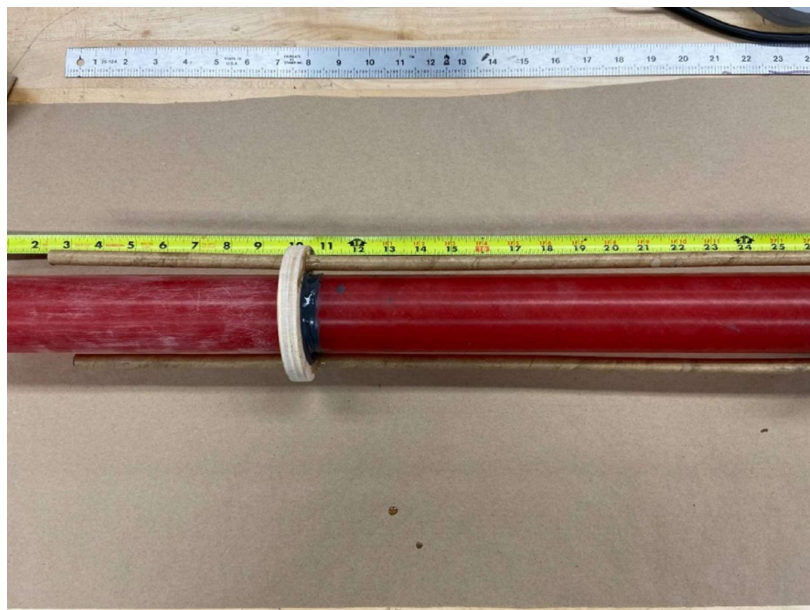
As-Built Motor Tube with Forward Centering Rings and Electronics Tubes
